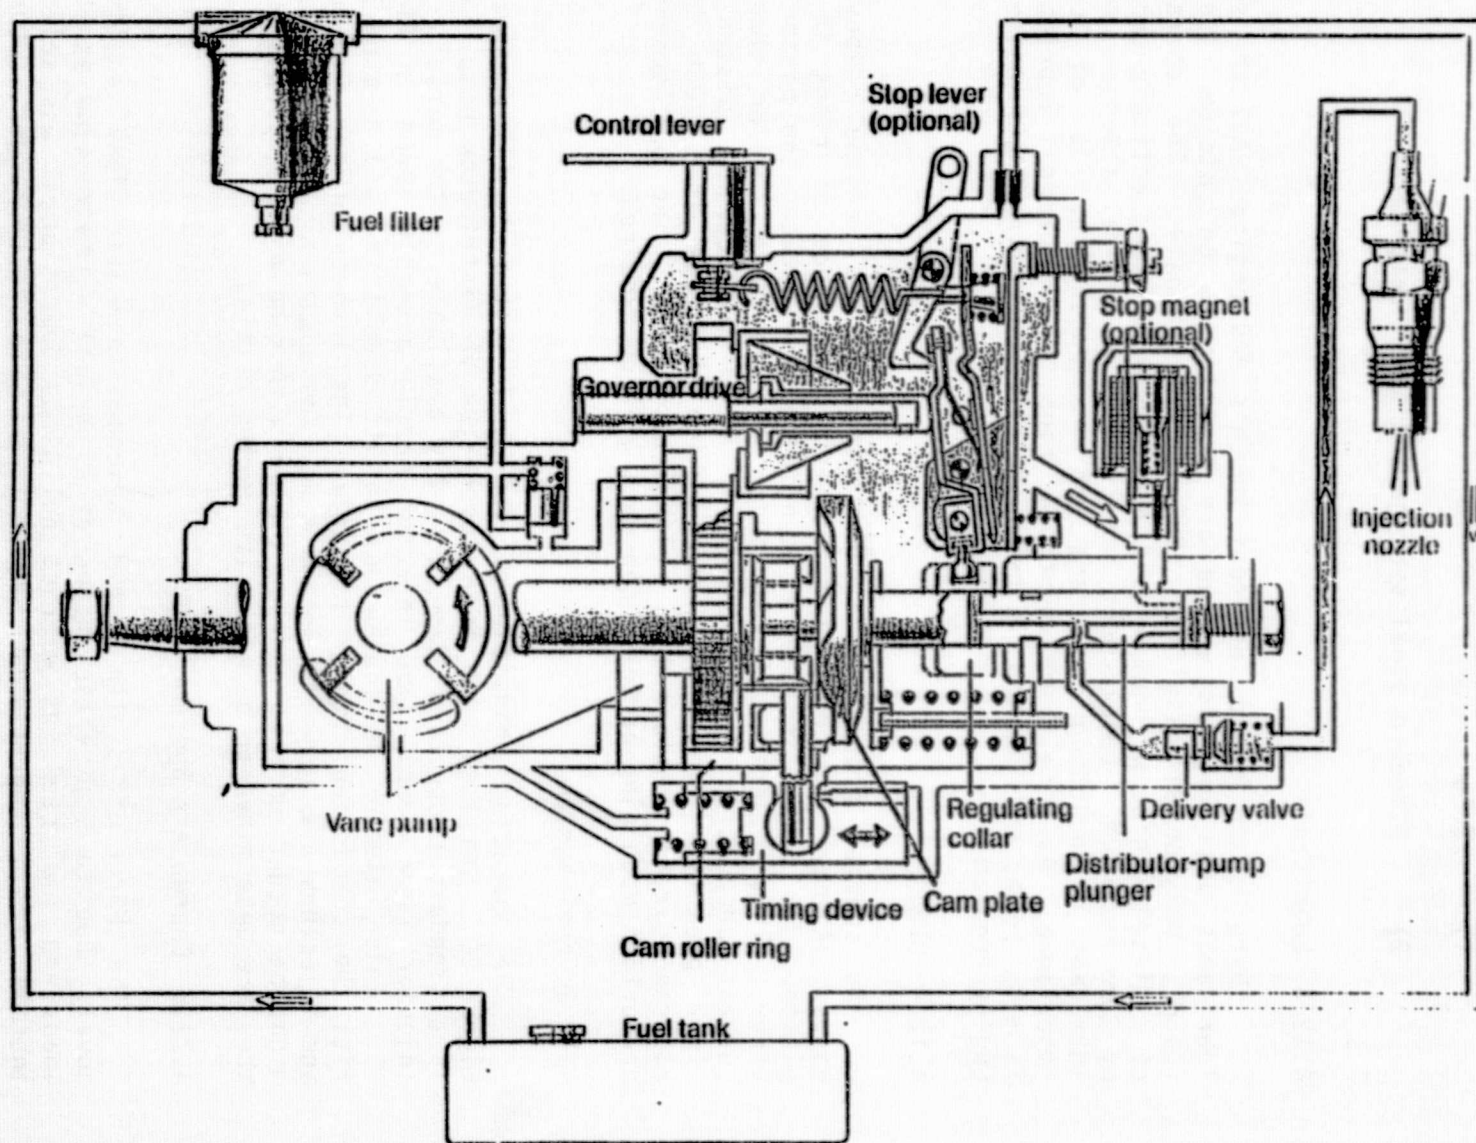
Operating Principle of a Diesel Fuel Injection System Incorporating the VE Distributor Type Injection Pump
